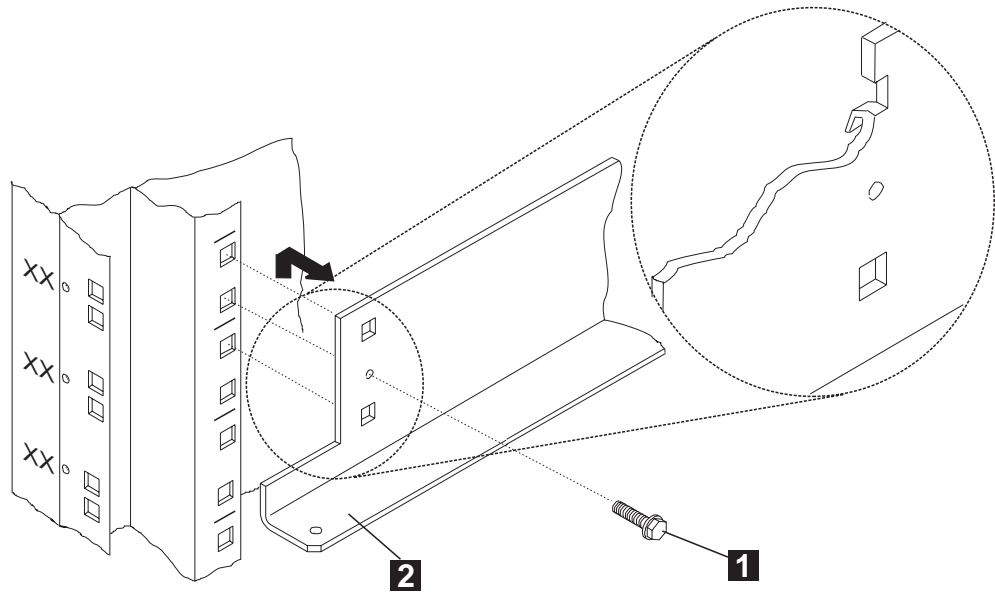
Removing of Brackets supporting the MAE in Controller Expansion
